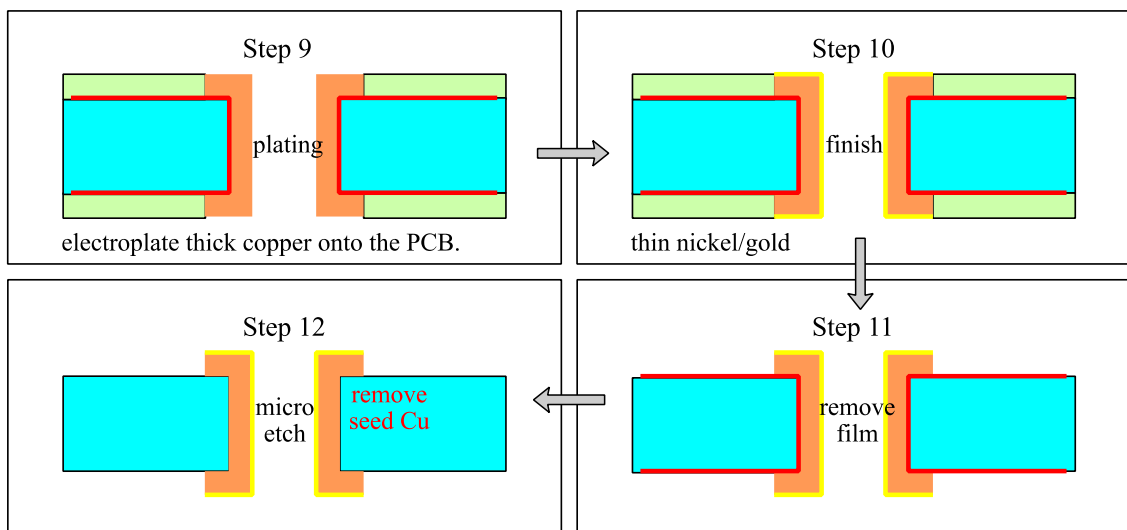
Steps 9 to 12 for the Lintek PCB manufacturing sequence for additive metal processing.
